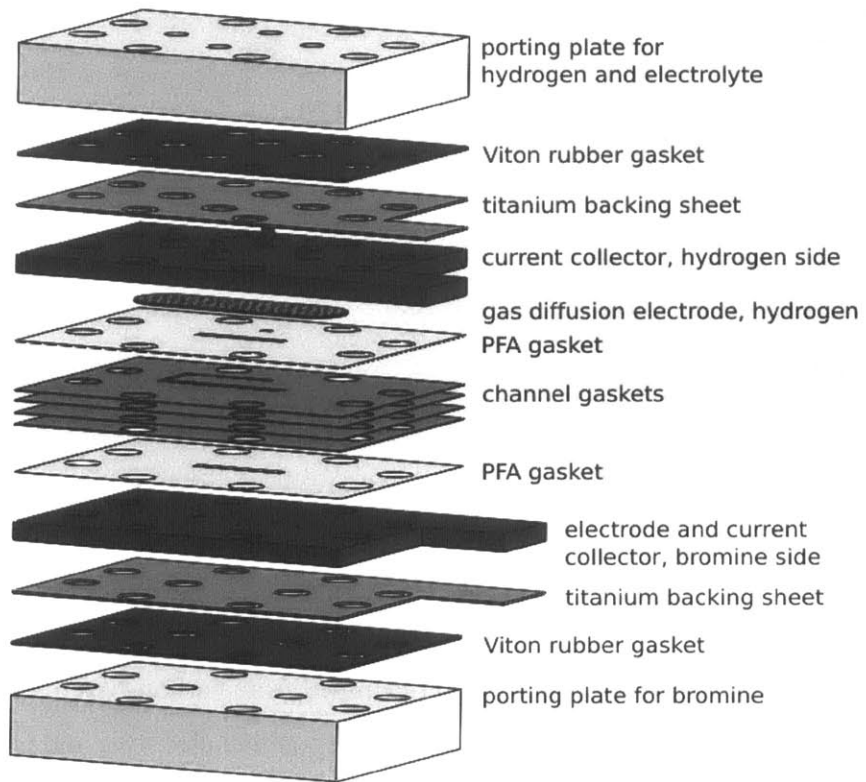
Exploded view of hydrogen bromine laminar flow battery stack assembly.
